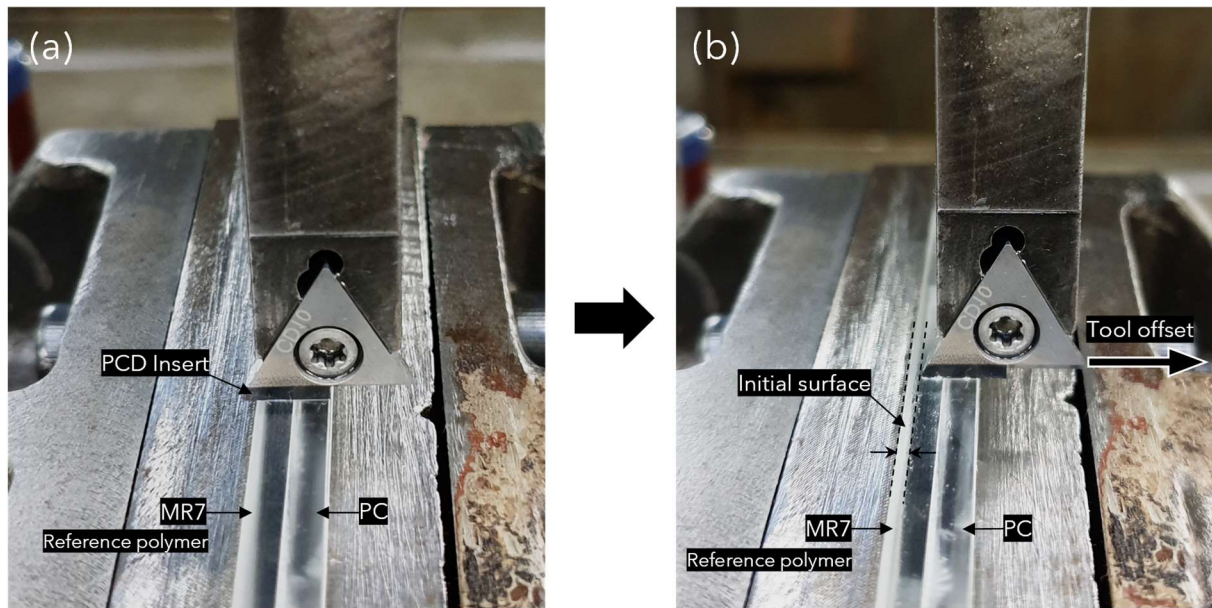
Example of the experimental cutting method with MR7/PC sample. (a) step 1: edge trimming of the whole hybrid worksurface, (b) step 2: orthogonal cutting test with the keeping of an initial surface zone on the reference polymer material
